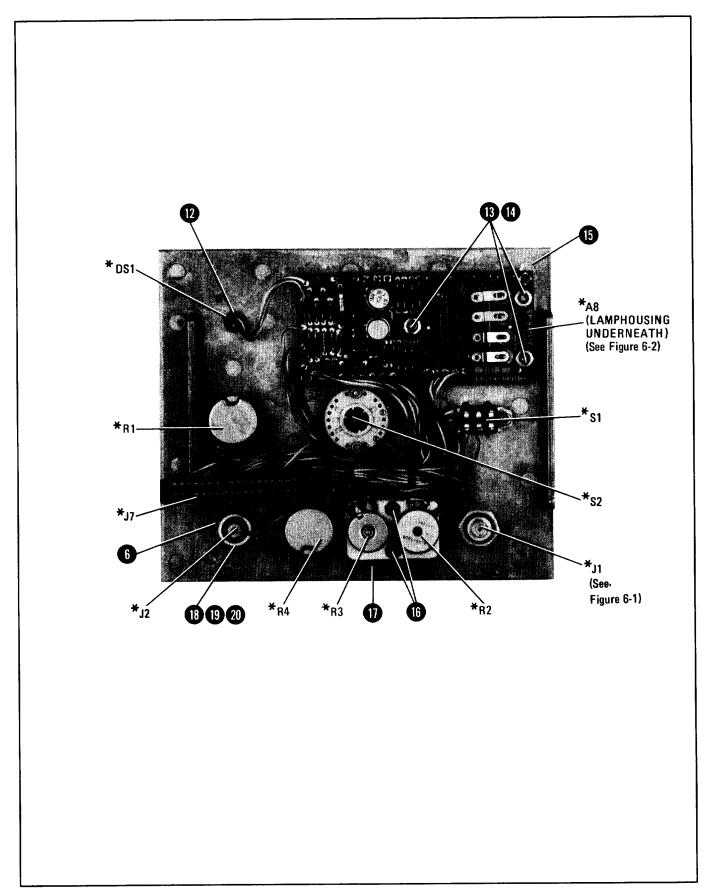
Front Panel Parts Identification (CHANGE F)
